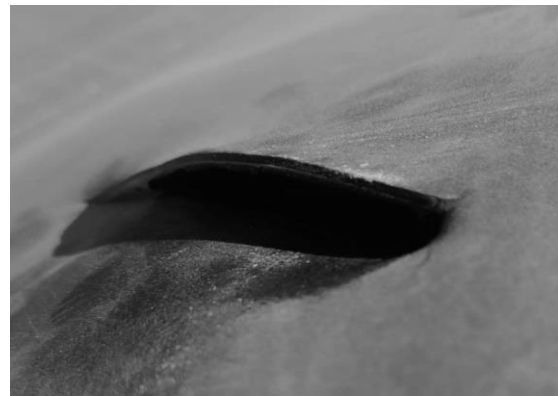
Burn out due to placing an extrusion gun groove on a liner for a long time while machine is on.
